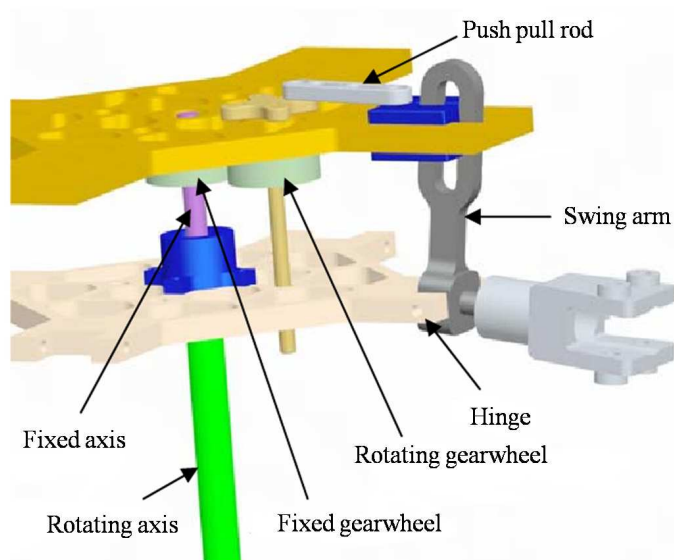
Detailed design of the gearwheel mechanism [16]
